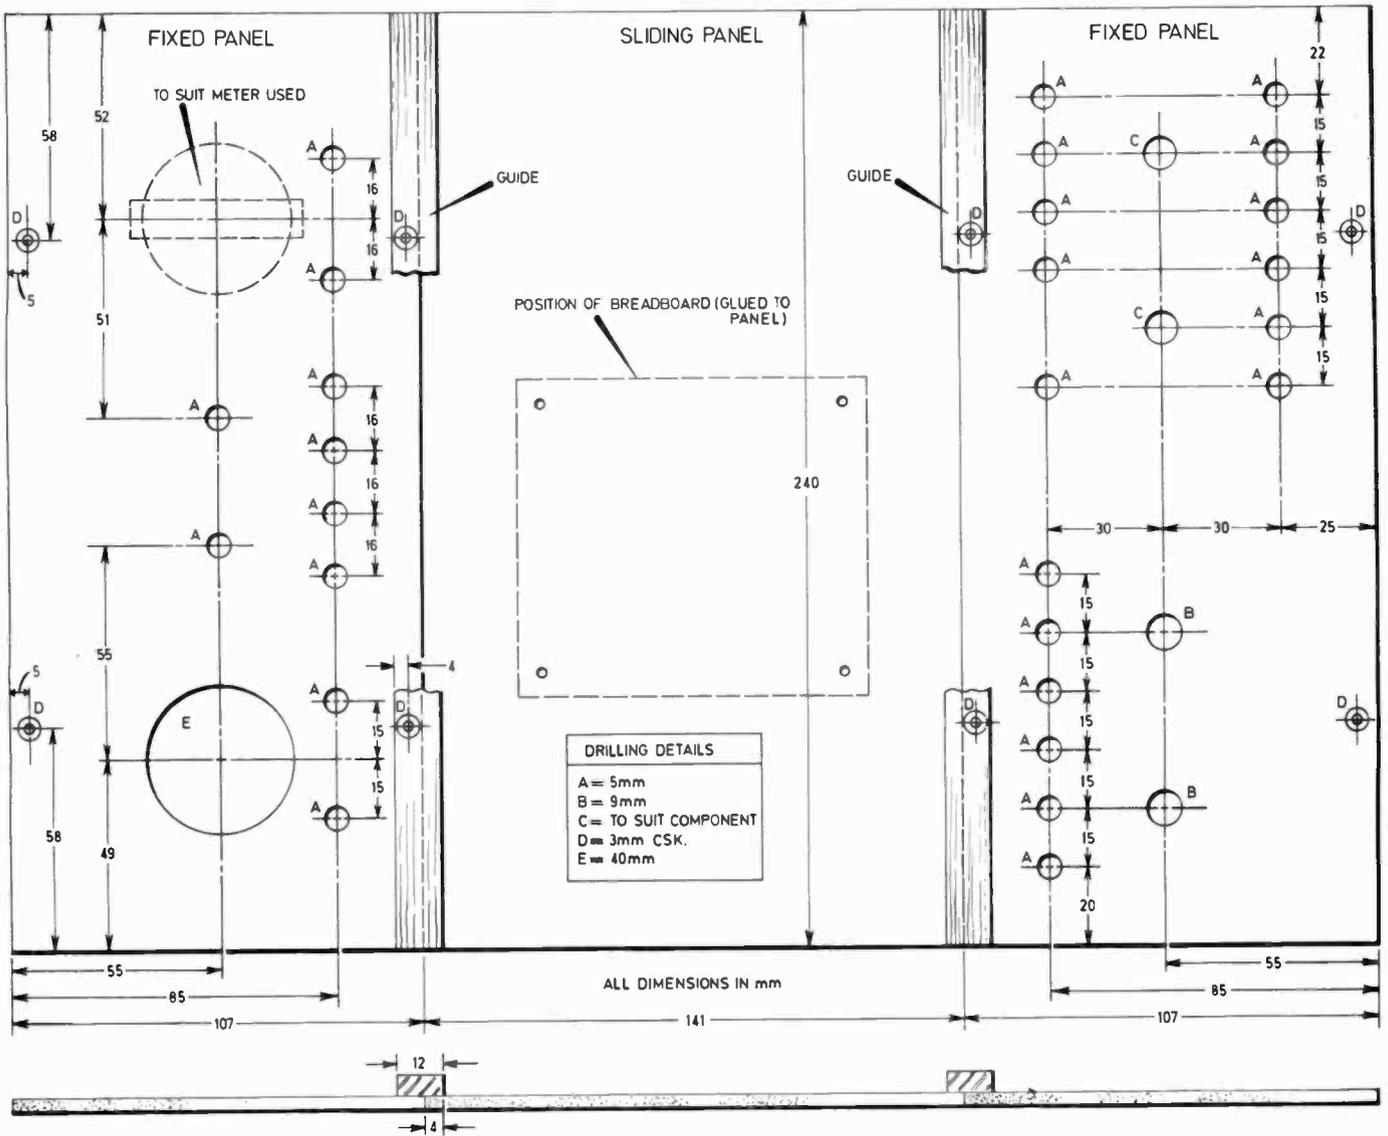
Dimensions and drilling details of the three top panels in situ. Hole dimensions for some components, i.e. switches and meter may need to be altered to suit component supplied.
